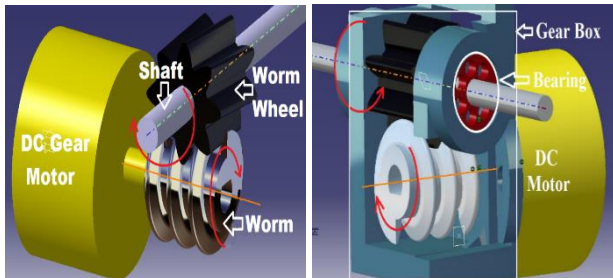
CAD model and Rendering image of worm wheel gearbox
